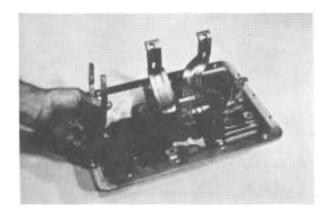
Remove 1st & reverse shift fork and rail assembly.
